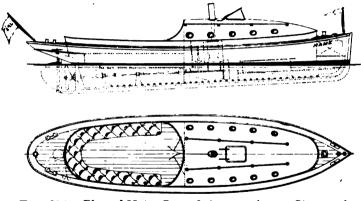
Plan of Motor Launch for carrying on Steamers' Decks.
